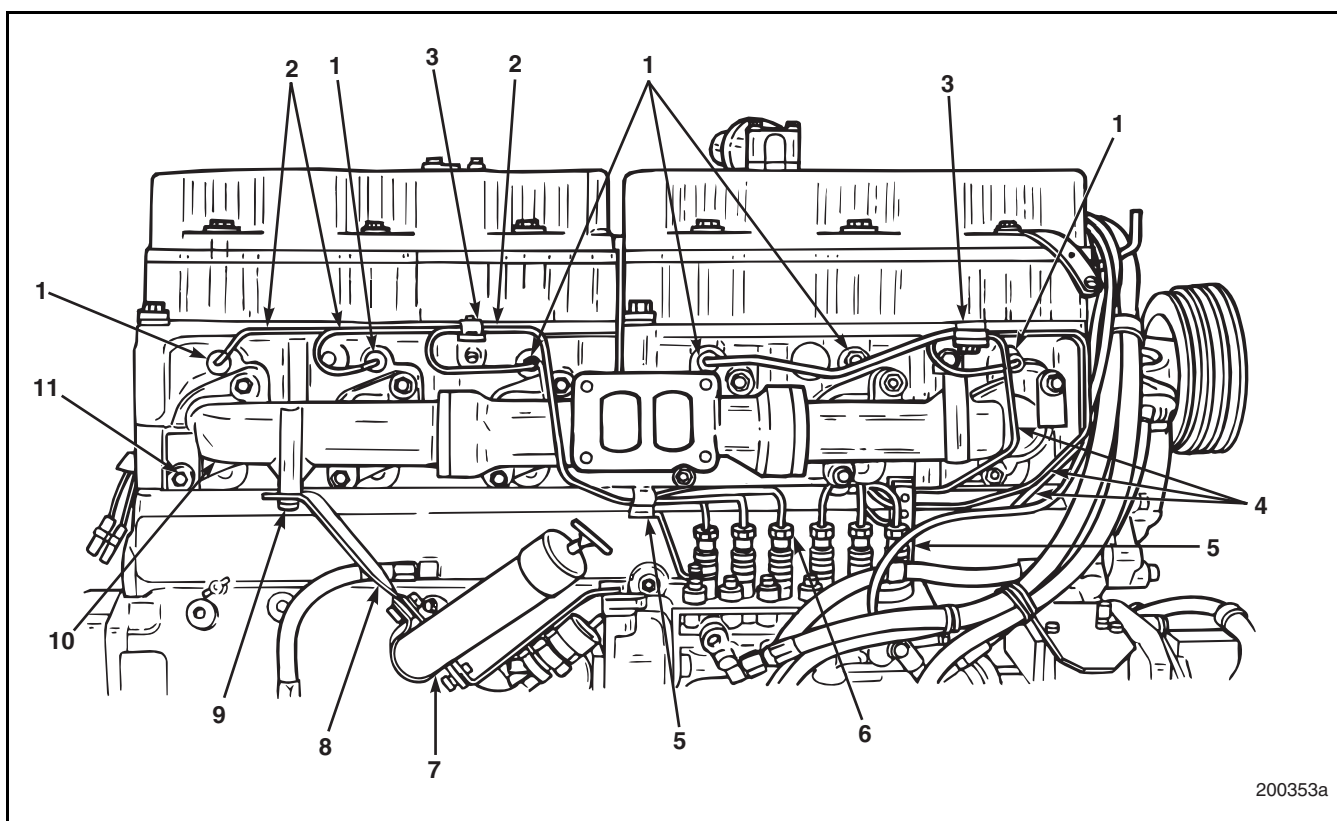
Fuel Nozzle Inlet Tube Assembly Installation
